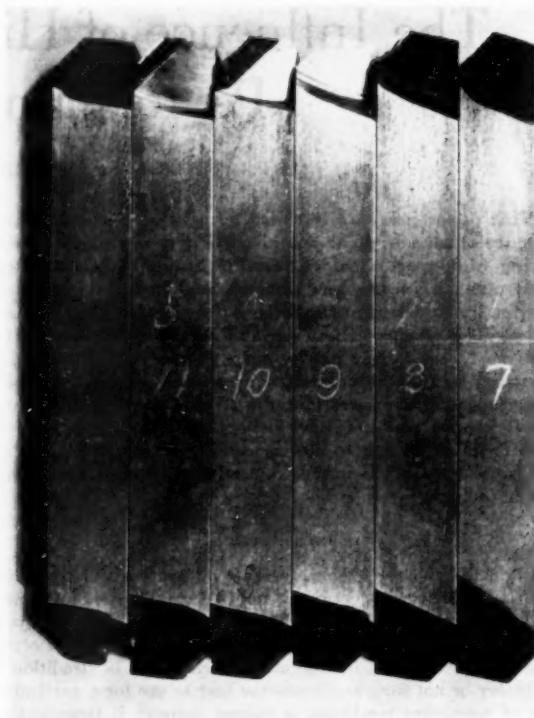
TYPICAL TOOLS USED IN FACE MILLING TOOL-LIFE TESTS
